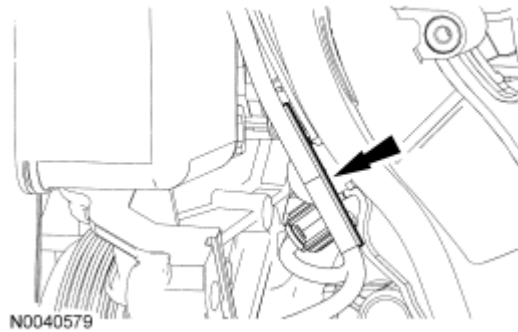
Locating Electrical Connector Pin-Type Retainer
